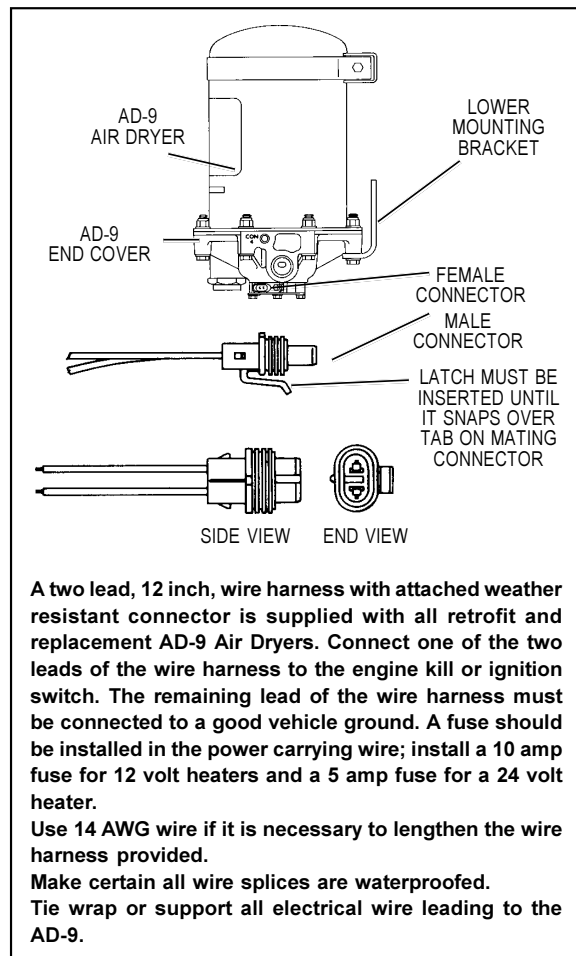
HEATER AND THERMOSTAT CONNECTOR
